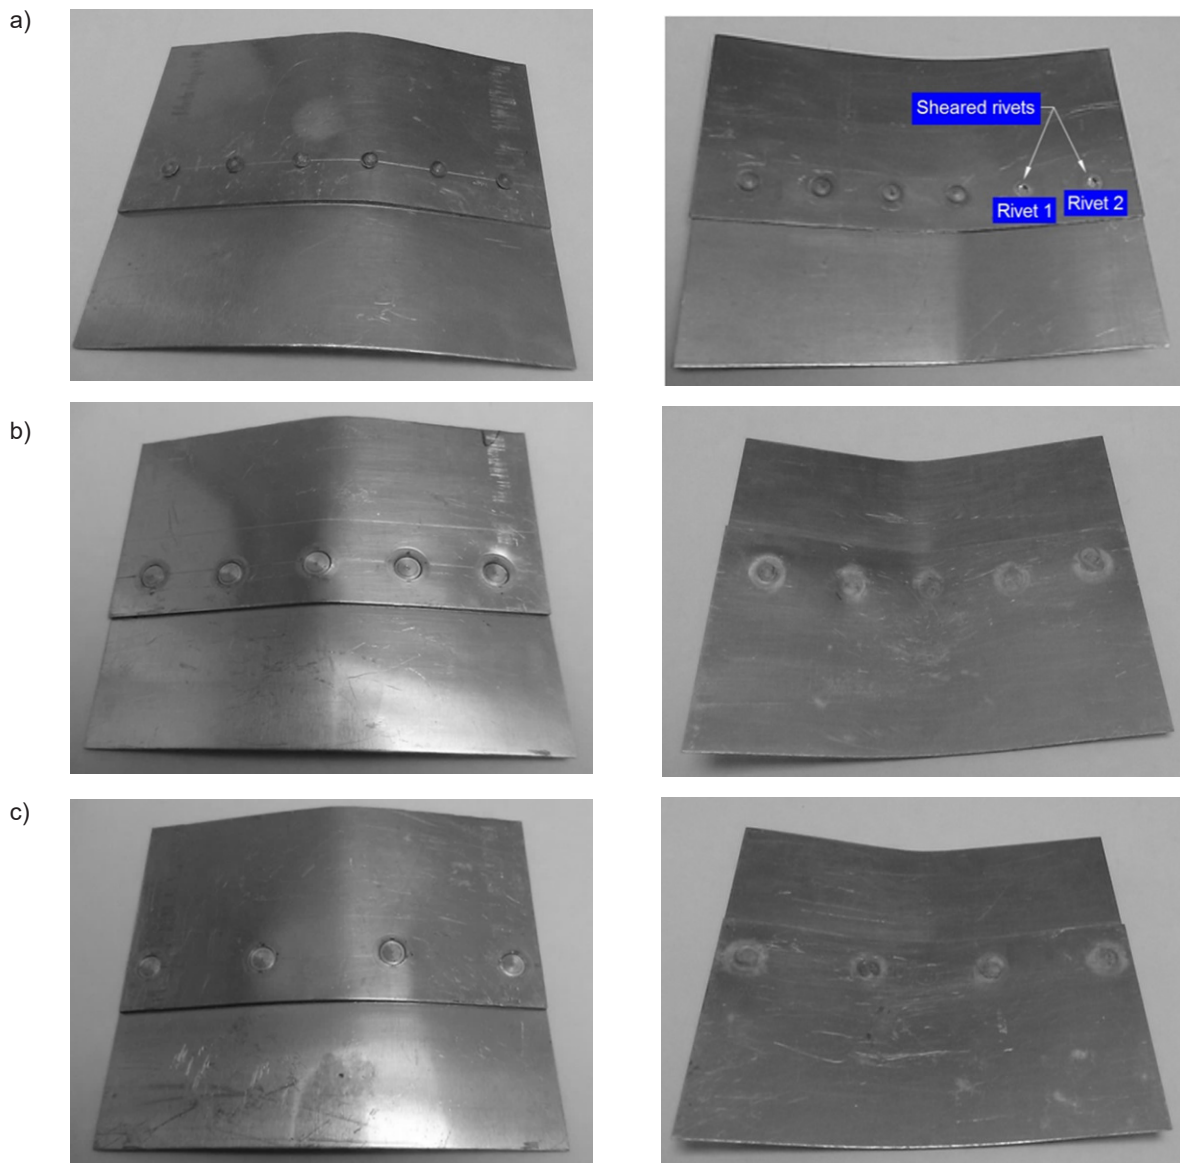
Lap joints of flat sheets after impact tests: a) riveted joint with a spacing of 23.5 mm, b) joint made with the RFSSW technology with a weld spacing of 29.5 mm, c) joint made with the RFSSW technology with a spacing of 44.25 mm
